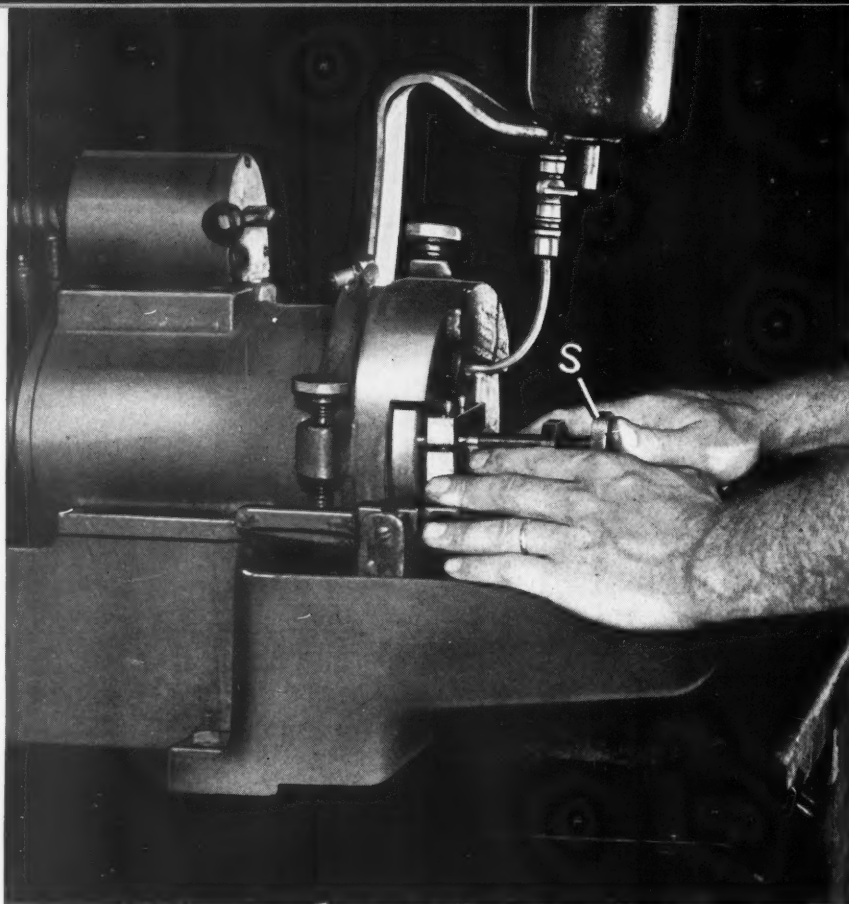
Grinding carbide insert shown in use in Fig. 7. Knurled screw (S) is employed to feed the tool into a metal-bonded diamond wheel
